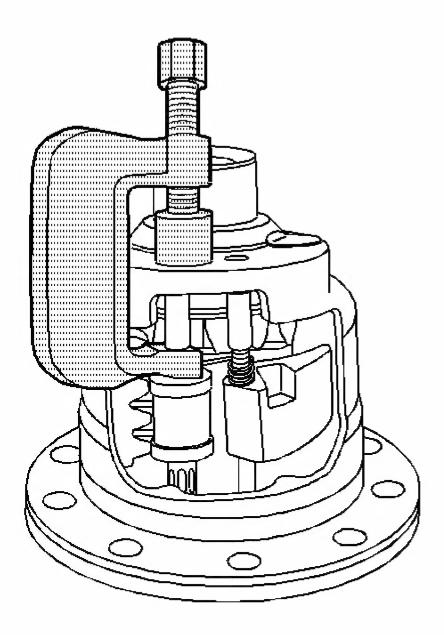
Locating Governor Bushing Courtesy of GENERAL MOTORS CORP.
